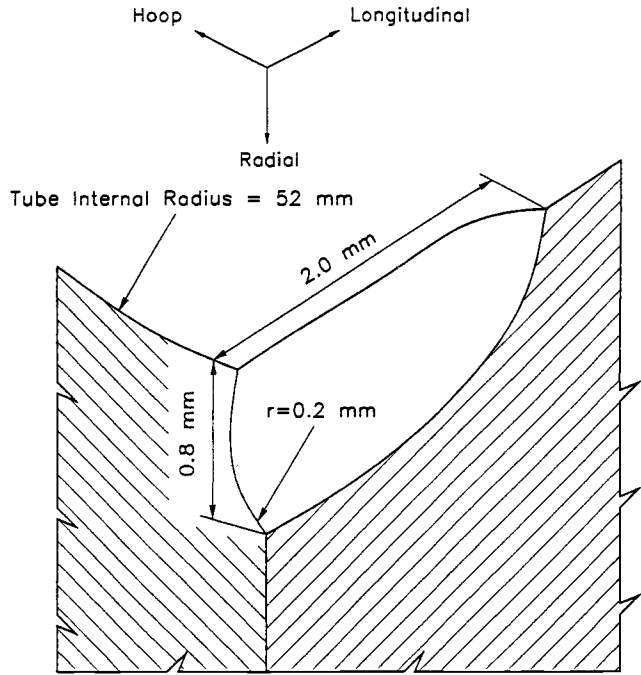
Detailed geometry of the semi-elliptical notch in the pressure tube, all dimensions in millimetres.
